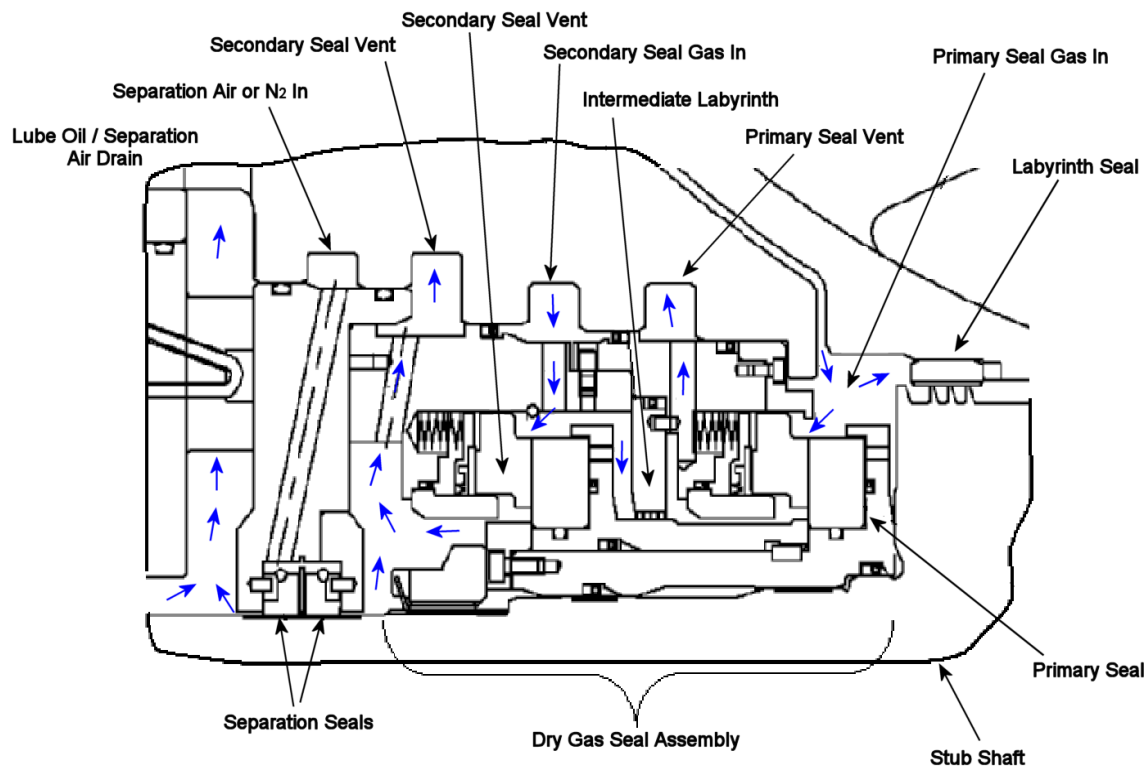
Tandem Seal Assembly with Intermediate-Labyrinth seal
